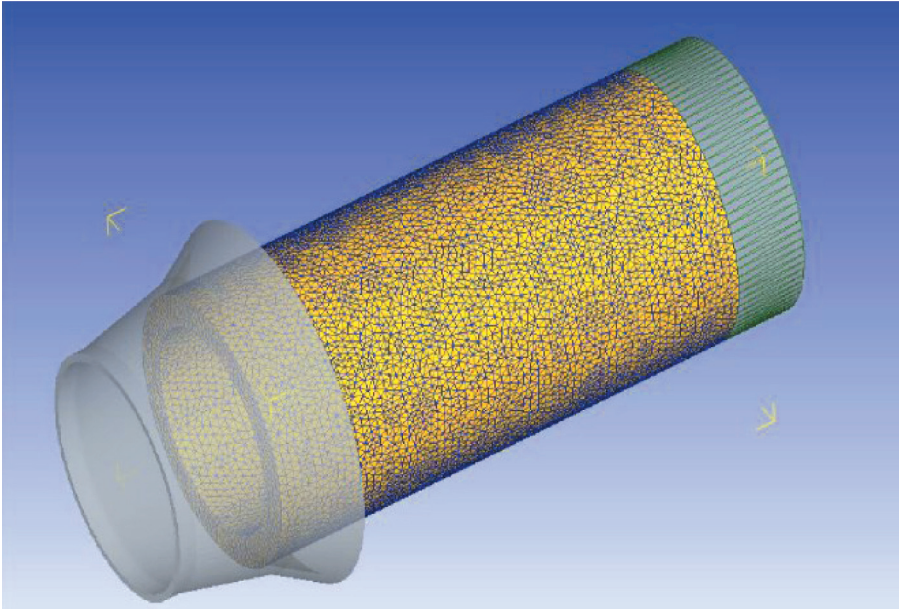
Die, workpiece (tube), and punch designed in CAD/CAE system
